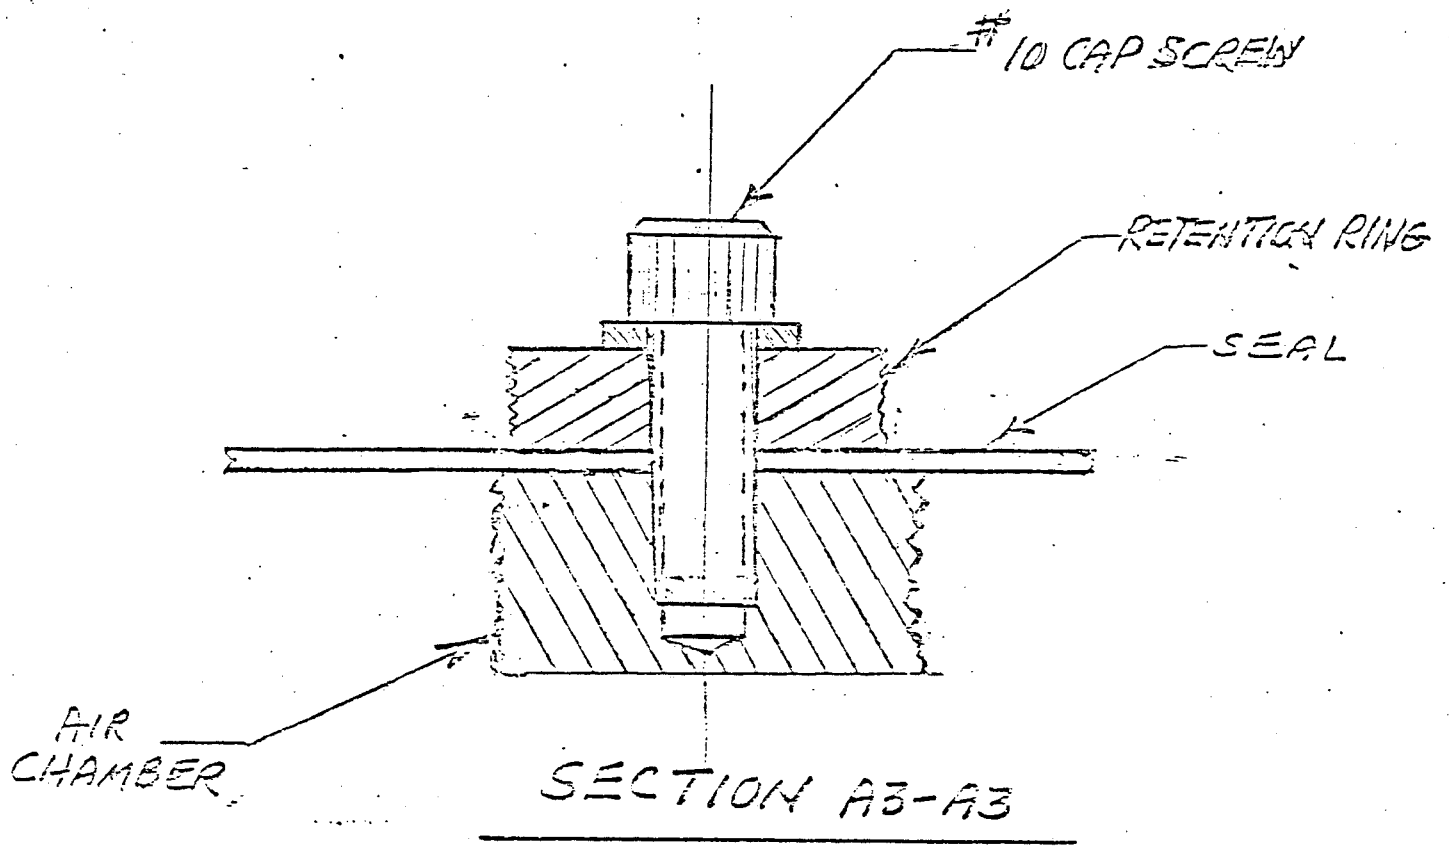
"Sketch of Hold-down Assembly - Section A3-A3
